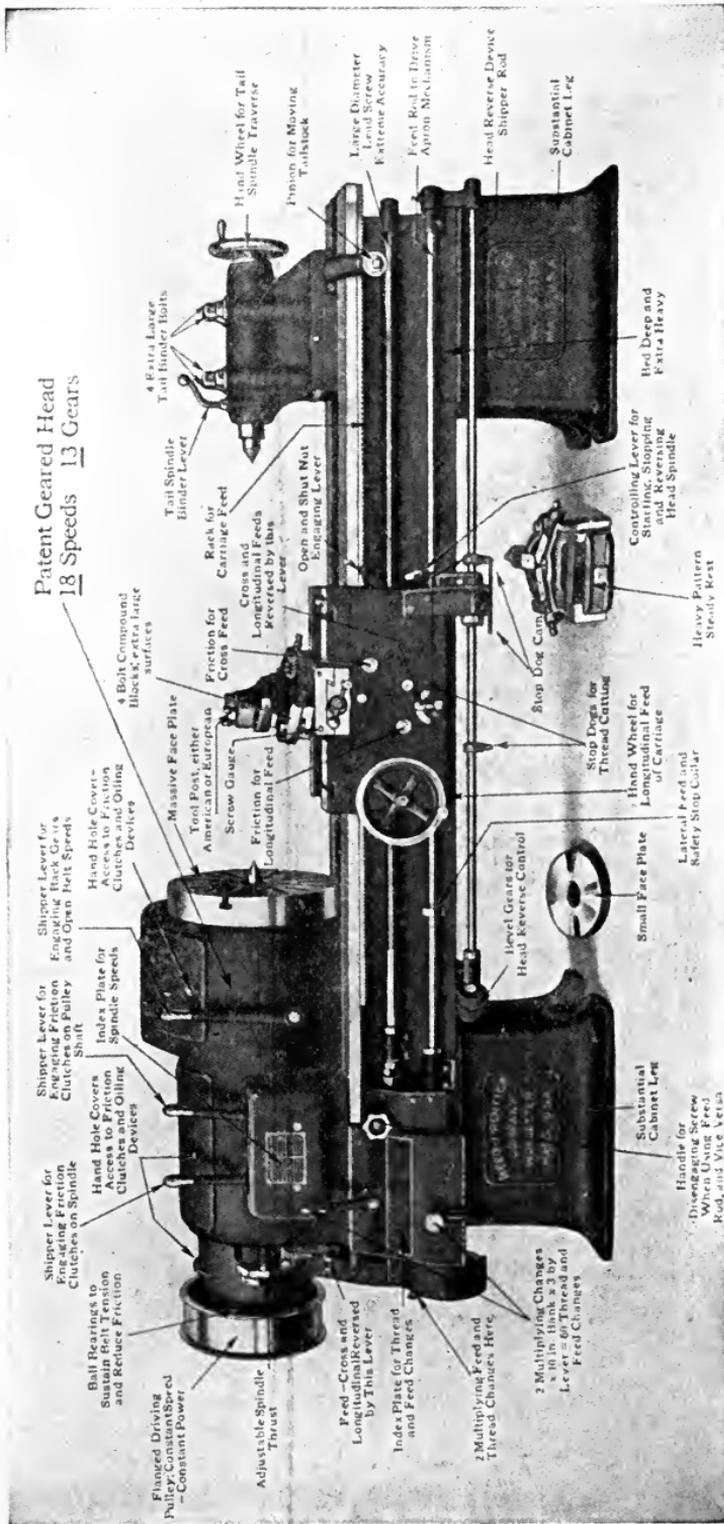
"Reed" Geared-Drive and Geared-Feed Production Lathe
